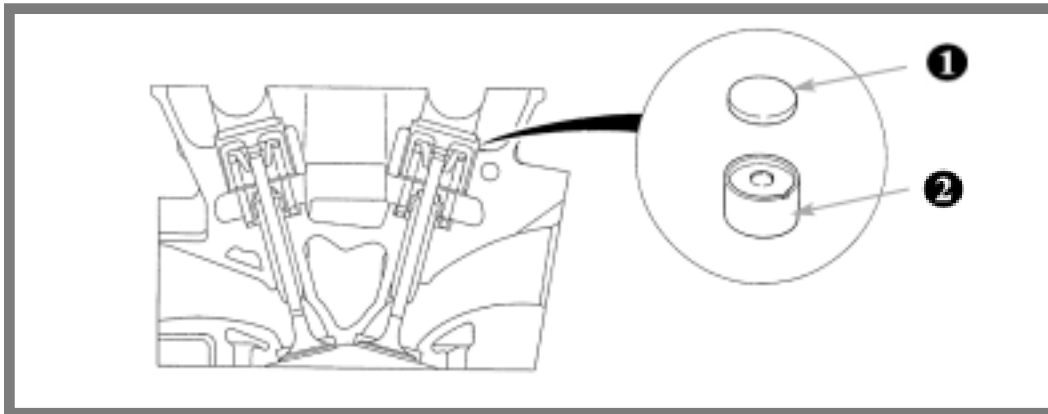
In some engines, a shim is used to adjust the valve clearance.
